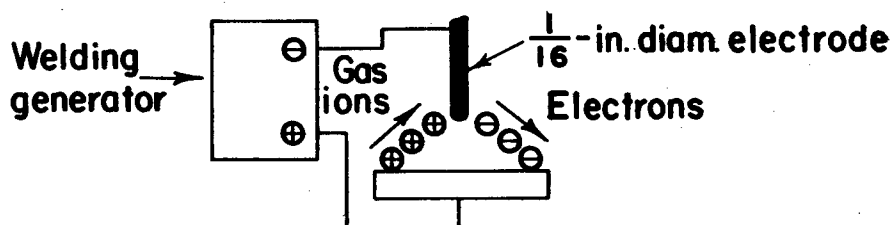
DIRECT-CURRENT STRAIGHT-POLARITY CONNECTION FOR GAS TUNGSTEN-ARC WELDING
